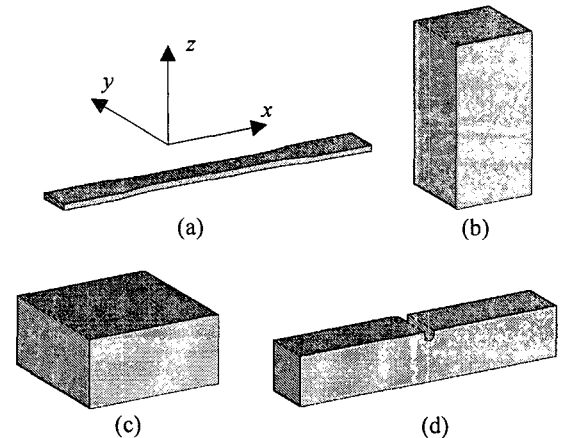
Specimens for measuring mechanical properties (a) tensile test (b) compressive test (c) hardness test (d) impact test
